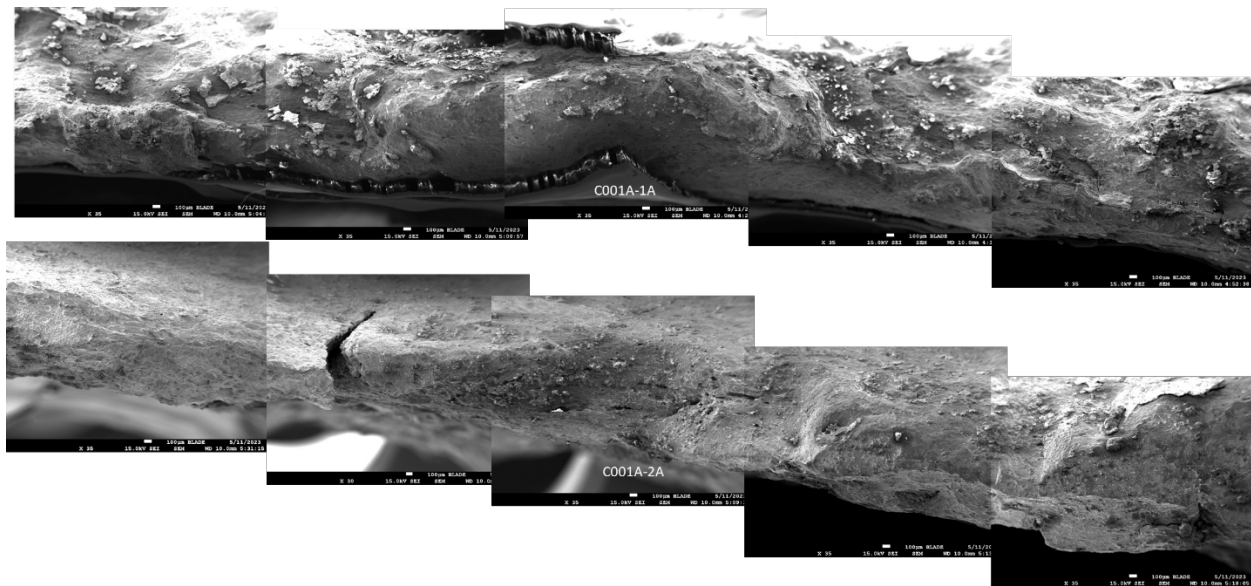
Mating of C001A-1A and C001A-2A Fracture Surfaces
